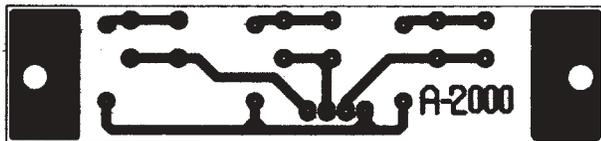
Actual-size, single-sided PCB layout for key-pad
